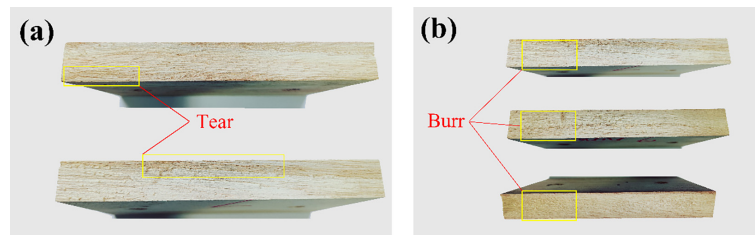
Processed defects of *Paulownia* workpiece: (a) tear; (b) burr.
